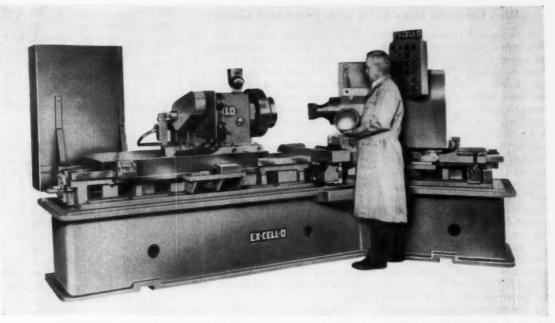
Special machine built by the Ex-Cell-O Corporation for turning hemispherical aluminum forgings
